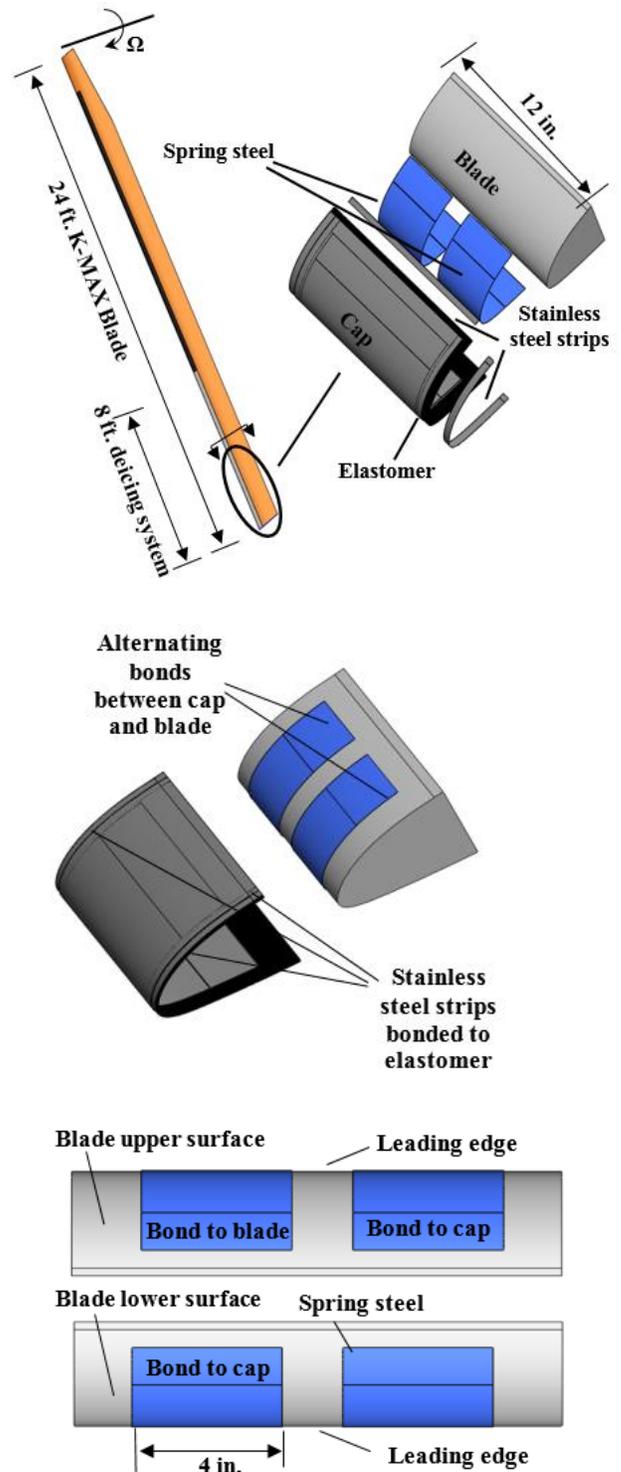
Schematic of deicing system assembly installed on full-scale blade.
